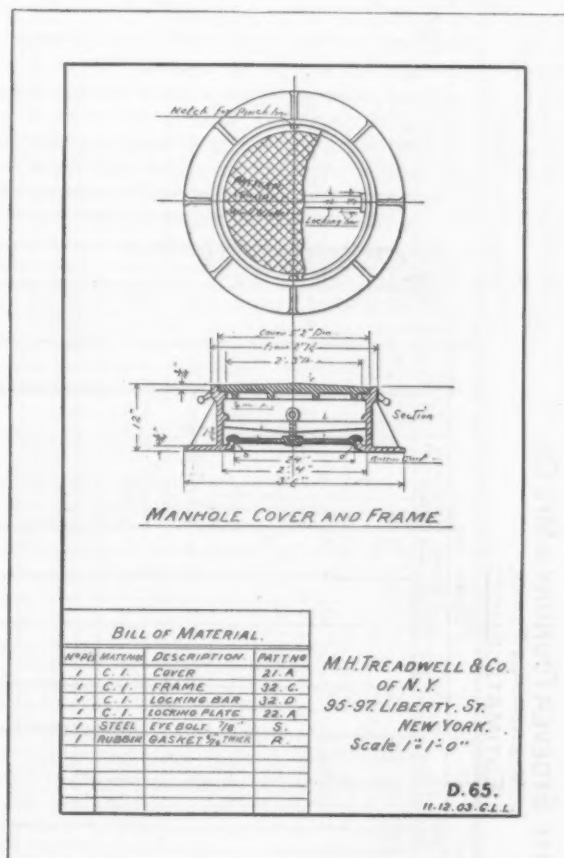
Plan and Section of Manhole Casting, with Frame and Cover.
